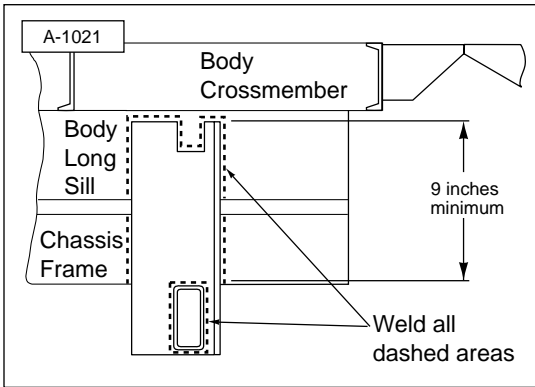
Weld mounting plates to body long sill and chassis frame.
